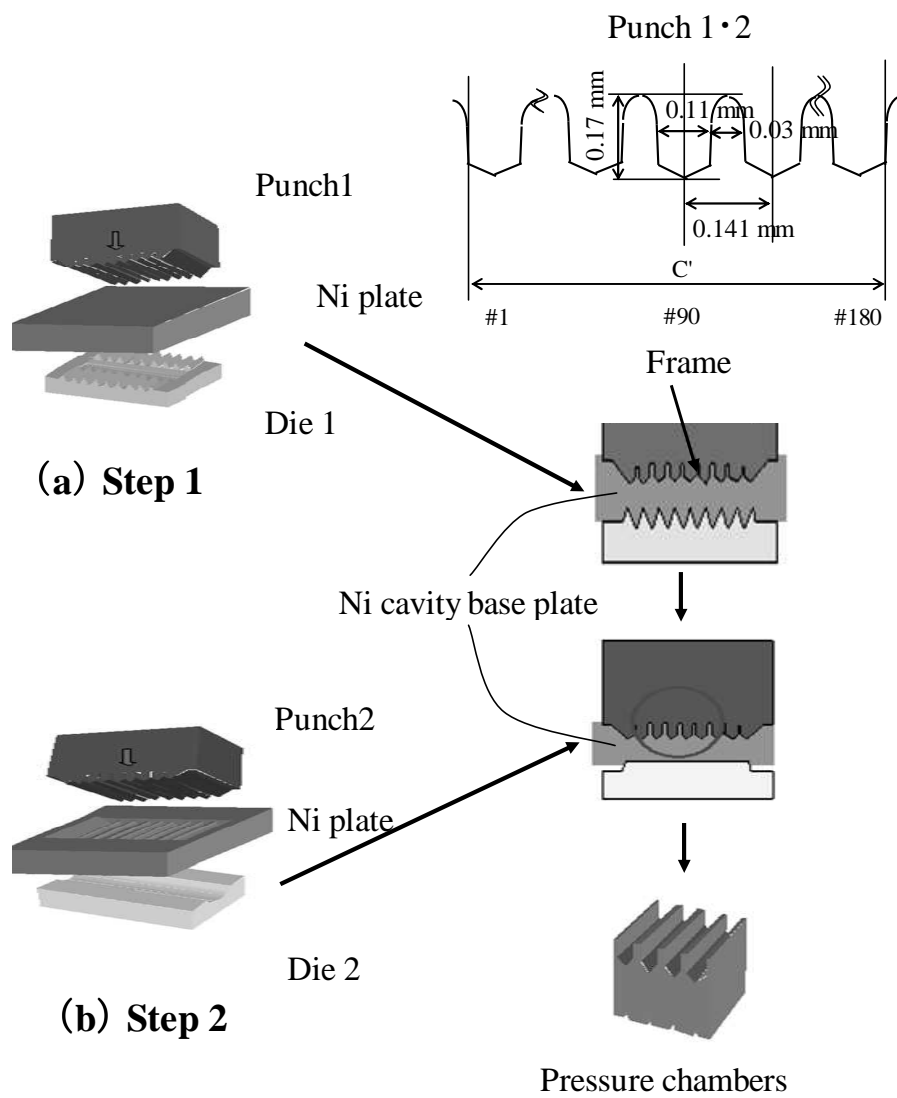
2 manufacturing steps of pressure chambers in precision mold
